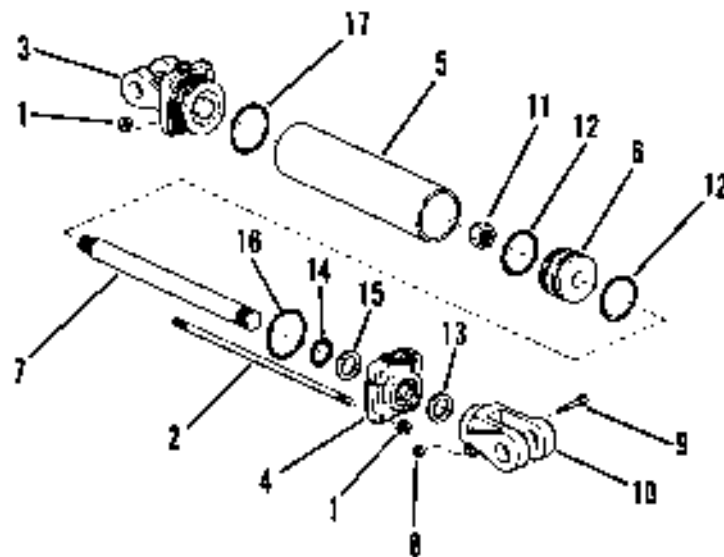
Platform Cylinder Assembly (Sheet 2 of 2) .
